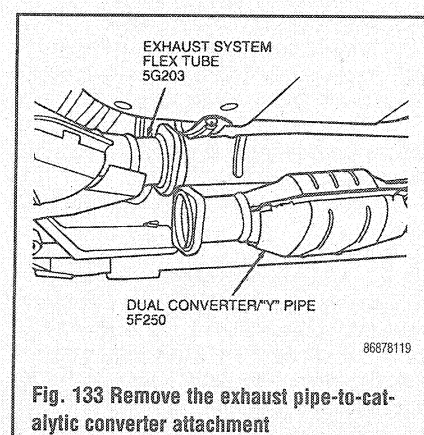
Remove the exhaust pipe-to-catalytic converter attachment
